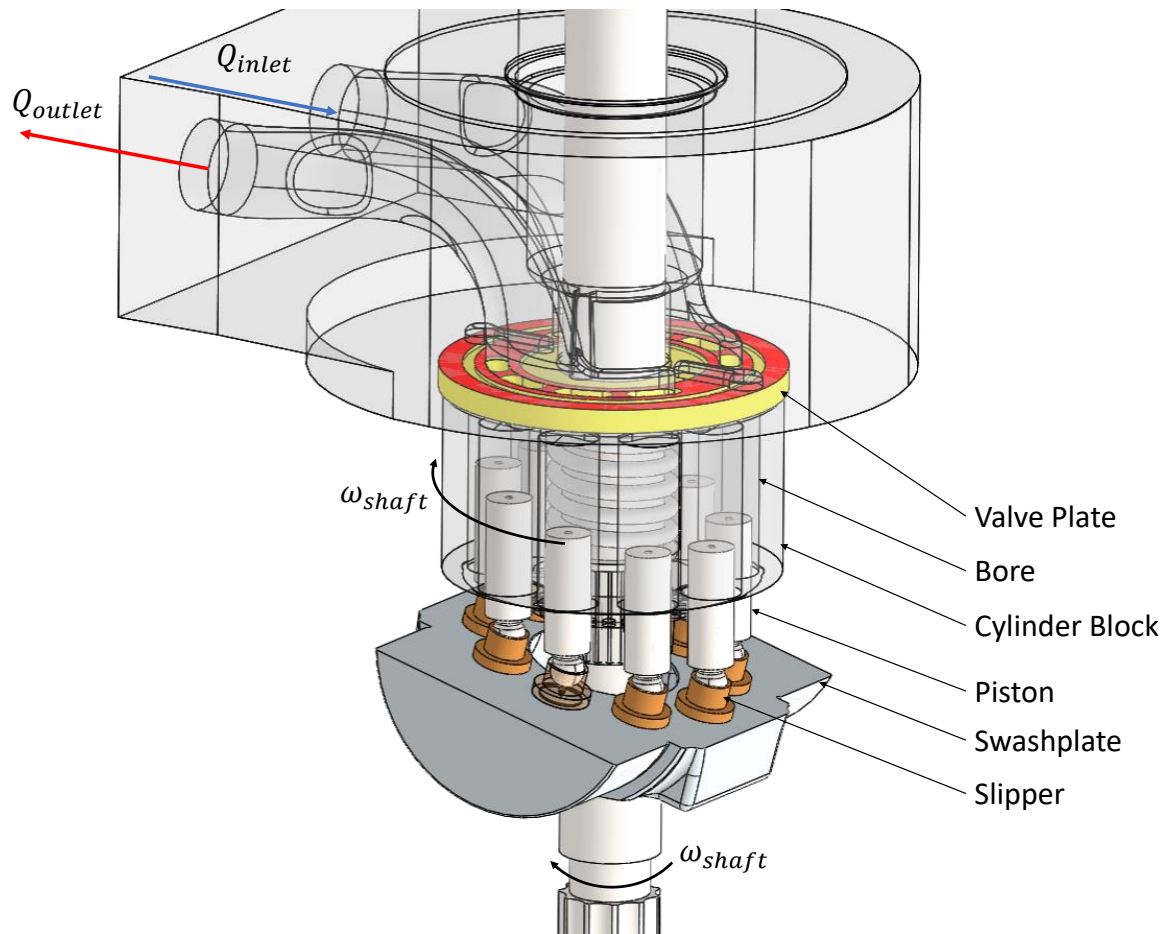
Components of a typical axial piston machine (Ref P1) during pumping
